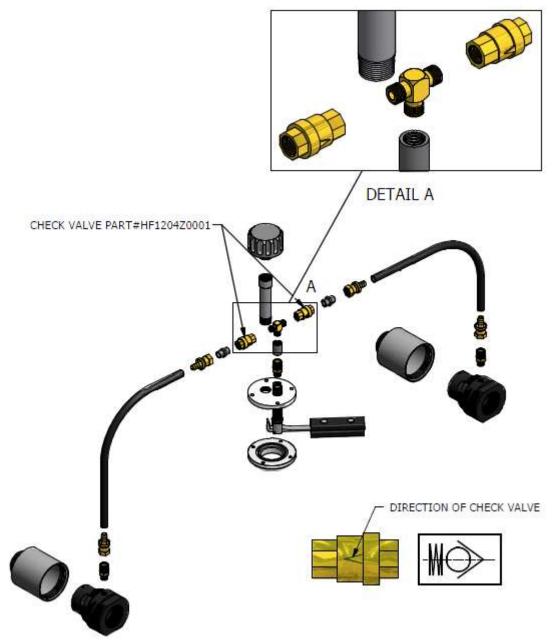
Multiple Filling Valves with Single Lever Float and Check Valve
